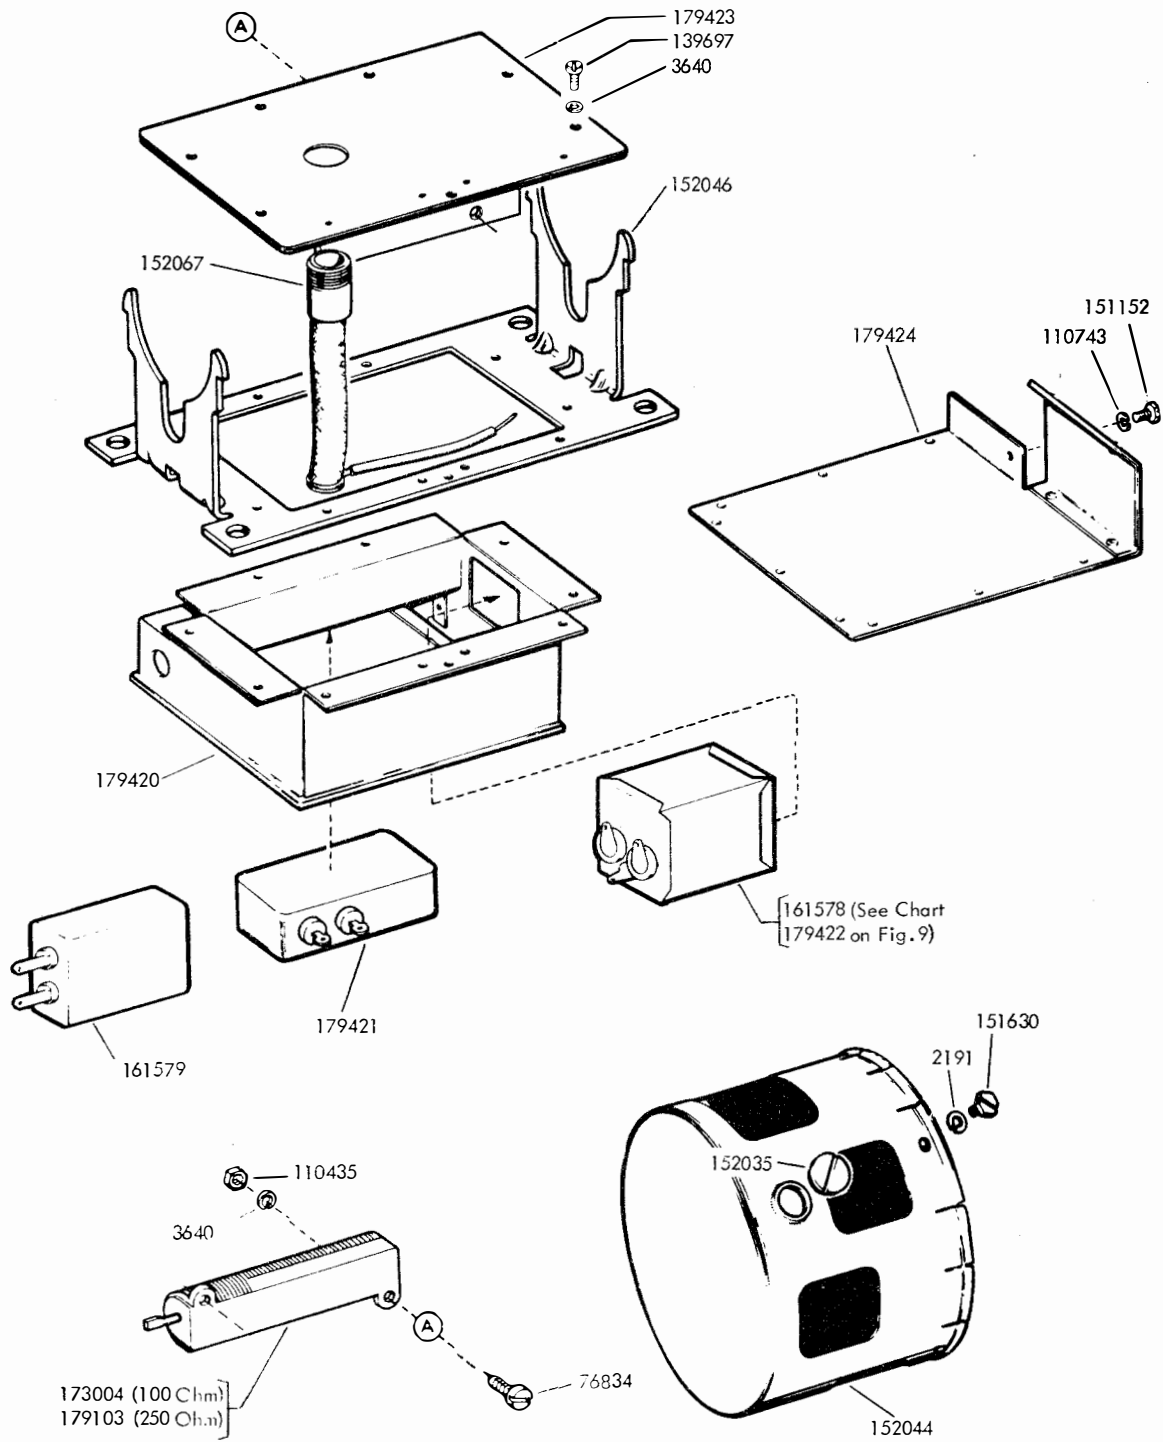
SERIES MOTOR MOUNTING PARTS WITH RF SUPPRESSION
